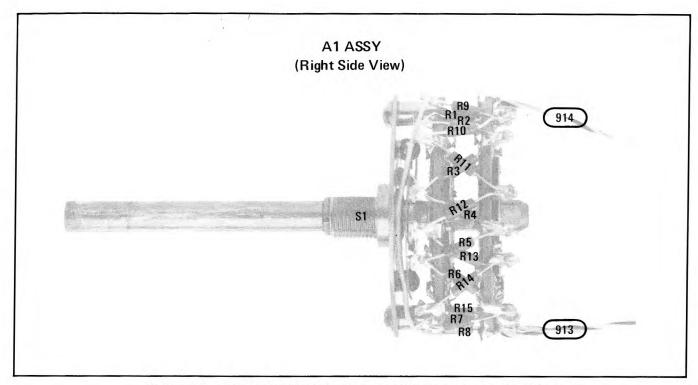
A1 Cal Factor Switch Assembly Component Locations
